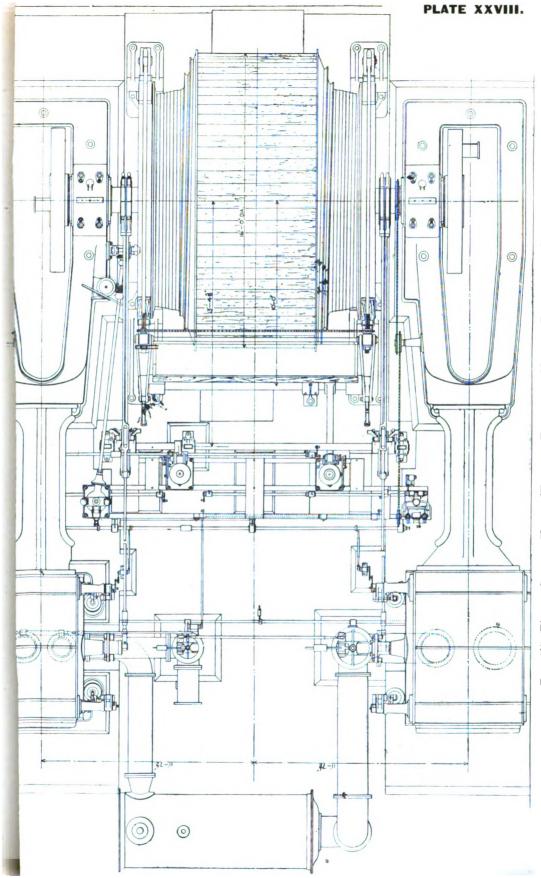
(Plan).—Corliss Valve Winding Engine by Messrs. Fraser and Chalmers.
